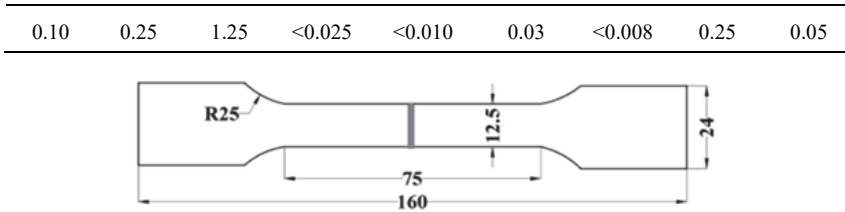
Dimensional specification of uniaxial stretching sample of spliced welded plate
